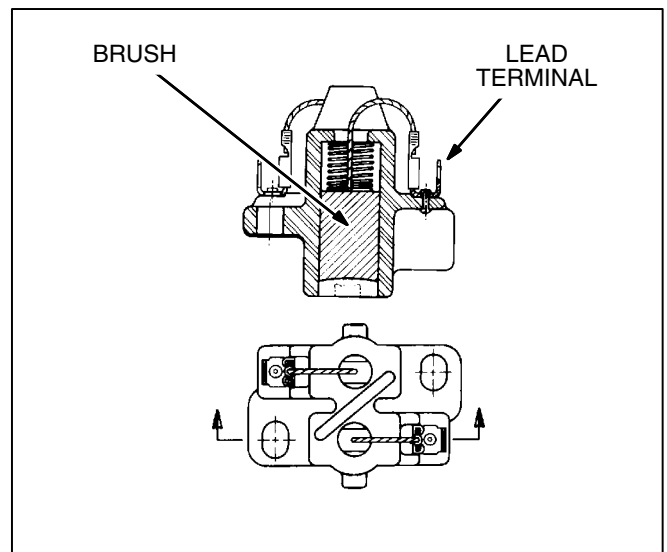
BRUSH BLOCK ASSEMBLY
